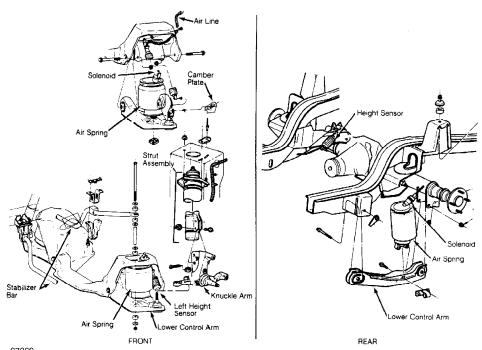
Exploded View of Front & Rear Suspension Components Courtesy of Ford Motor Co.
